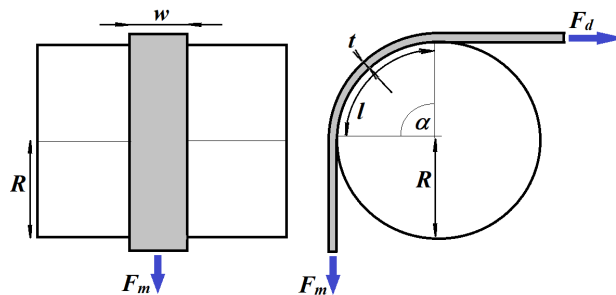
Diagram of drawing the belt over a cylindrical surface with an indication of geometric dimensions and applied tensile forces.
